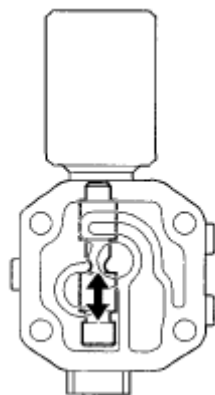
Checking A/T Clutch Pressure Control Solenoid Valve A
